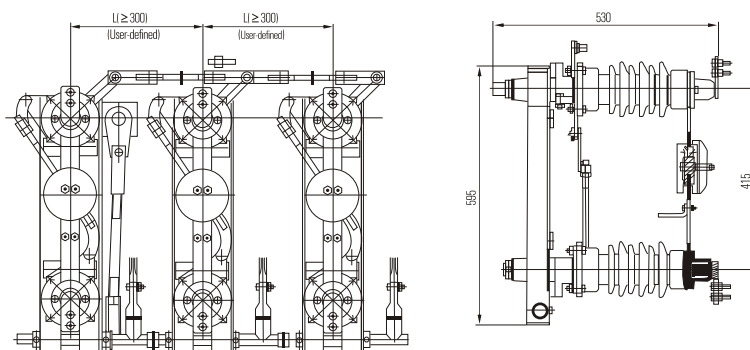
GW4-12D/630 tri-pole link assembly drawing
